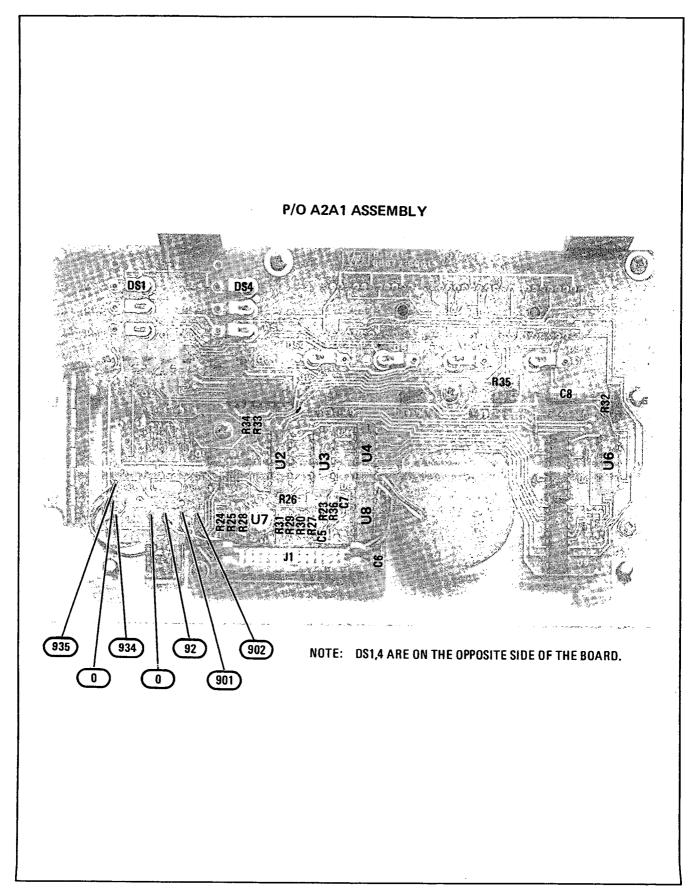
P/O A2A1 DCU Front Panel Assembly Component Locations
